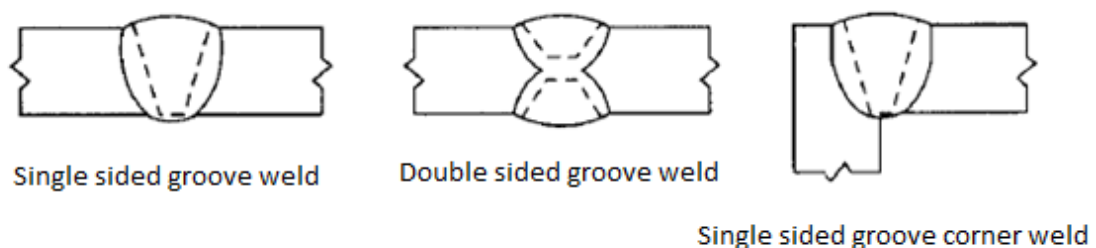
Typical CJP Weld (McCormac and Csernak, 2012)
